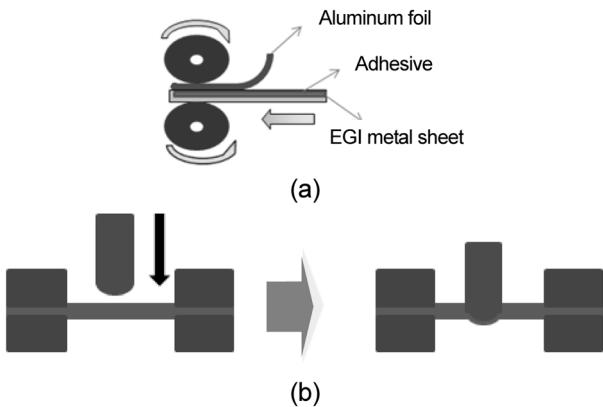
Schematic drawing of (a) laminating machine; (b) Erichsen tester.
